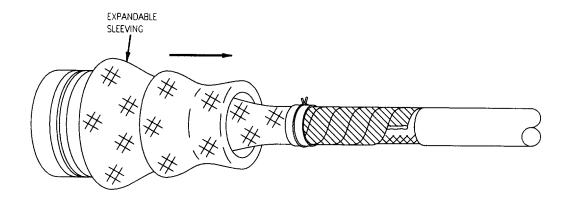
Folding Expandable Sleeving Onto Cable Assembly
